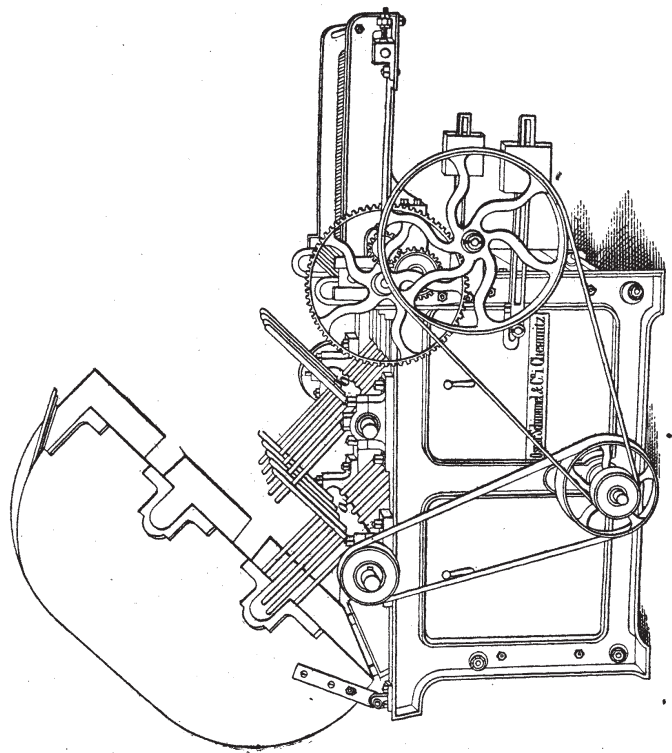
SCUTCHING MACHINE, CONSTRUCTED BY MESSRS. OSCAR SCHIMMEL AND CO., ENGINEERS, CHEMNITZ.
